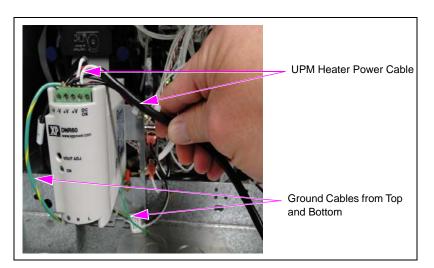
Connecting Switching Power Supply to Dispenser Chassis
